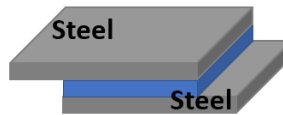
Schematic diagram of the steel-steel single-lap joints joined by conductive adhesive.
